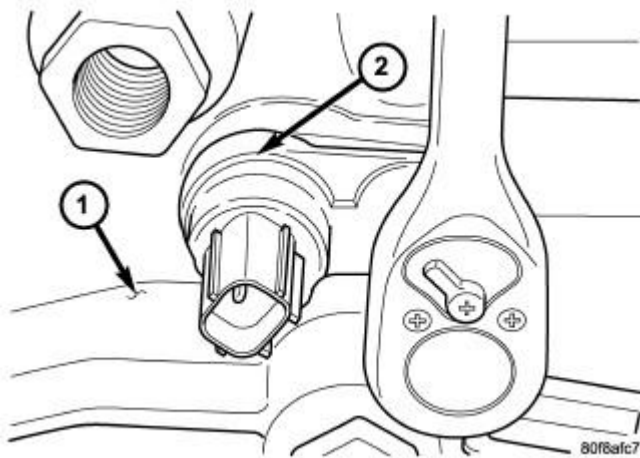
Removing/Installing Input Speed Sensor Bolt
